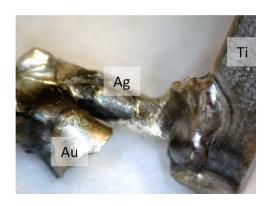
An example of titanium welded to gold and silver. The gold to titanium weld looks clean but is brittle. The silver to titanium weld also looks good and is strong.
